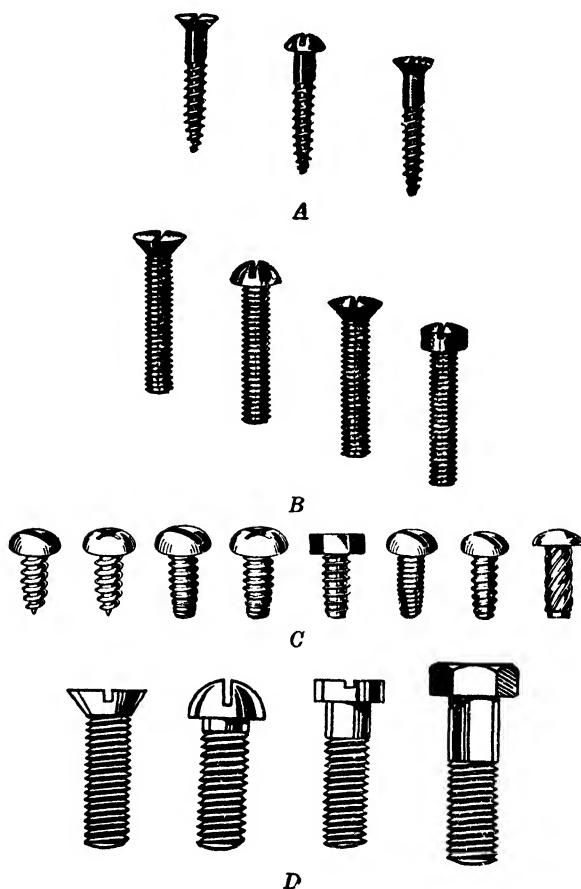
Types of screws: A, wood; B, machine, C, self-threading or tapping; D, cap.
